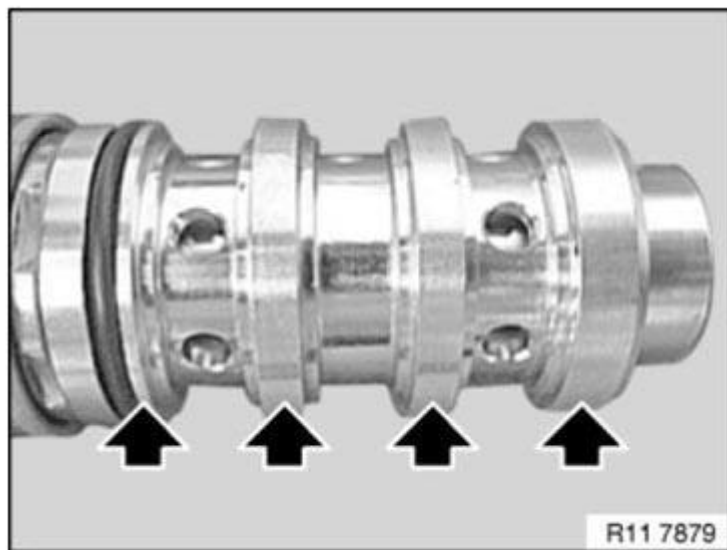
Inspecting Notches Or Scratches For Solenoid Valve Housing
